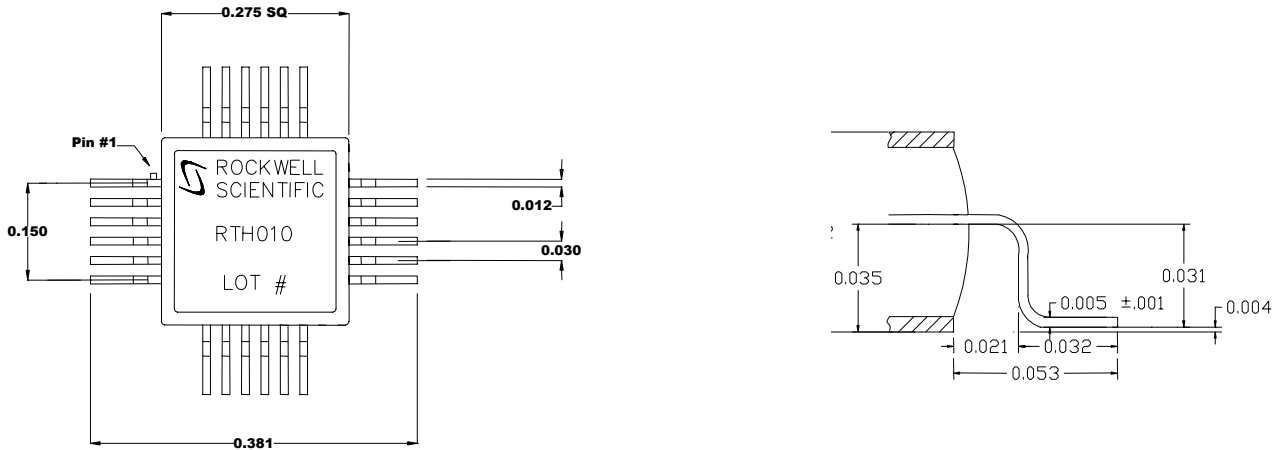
RTH010 package outline. Dimensions shown in inches, tolerance ± 0.002 inch
